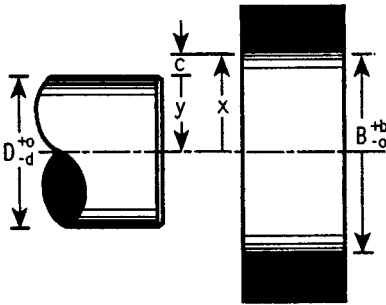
Dimensions and unilateral tolerances on a journal and bushing. In a specific bearing assembly the bushing radius x , the journal radius y , and the radial clearance c are signed variates related as shown.
